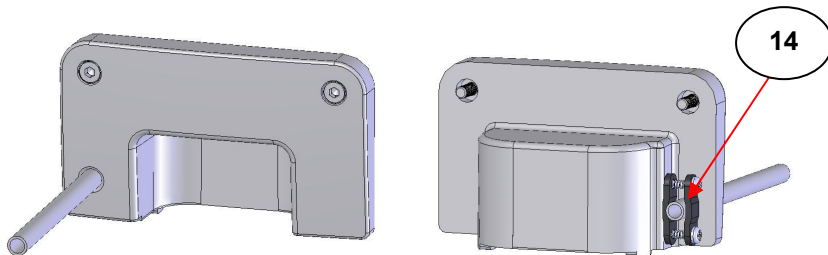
Front Cover Plate with Purge Tube – Front and Back Views
